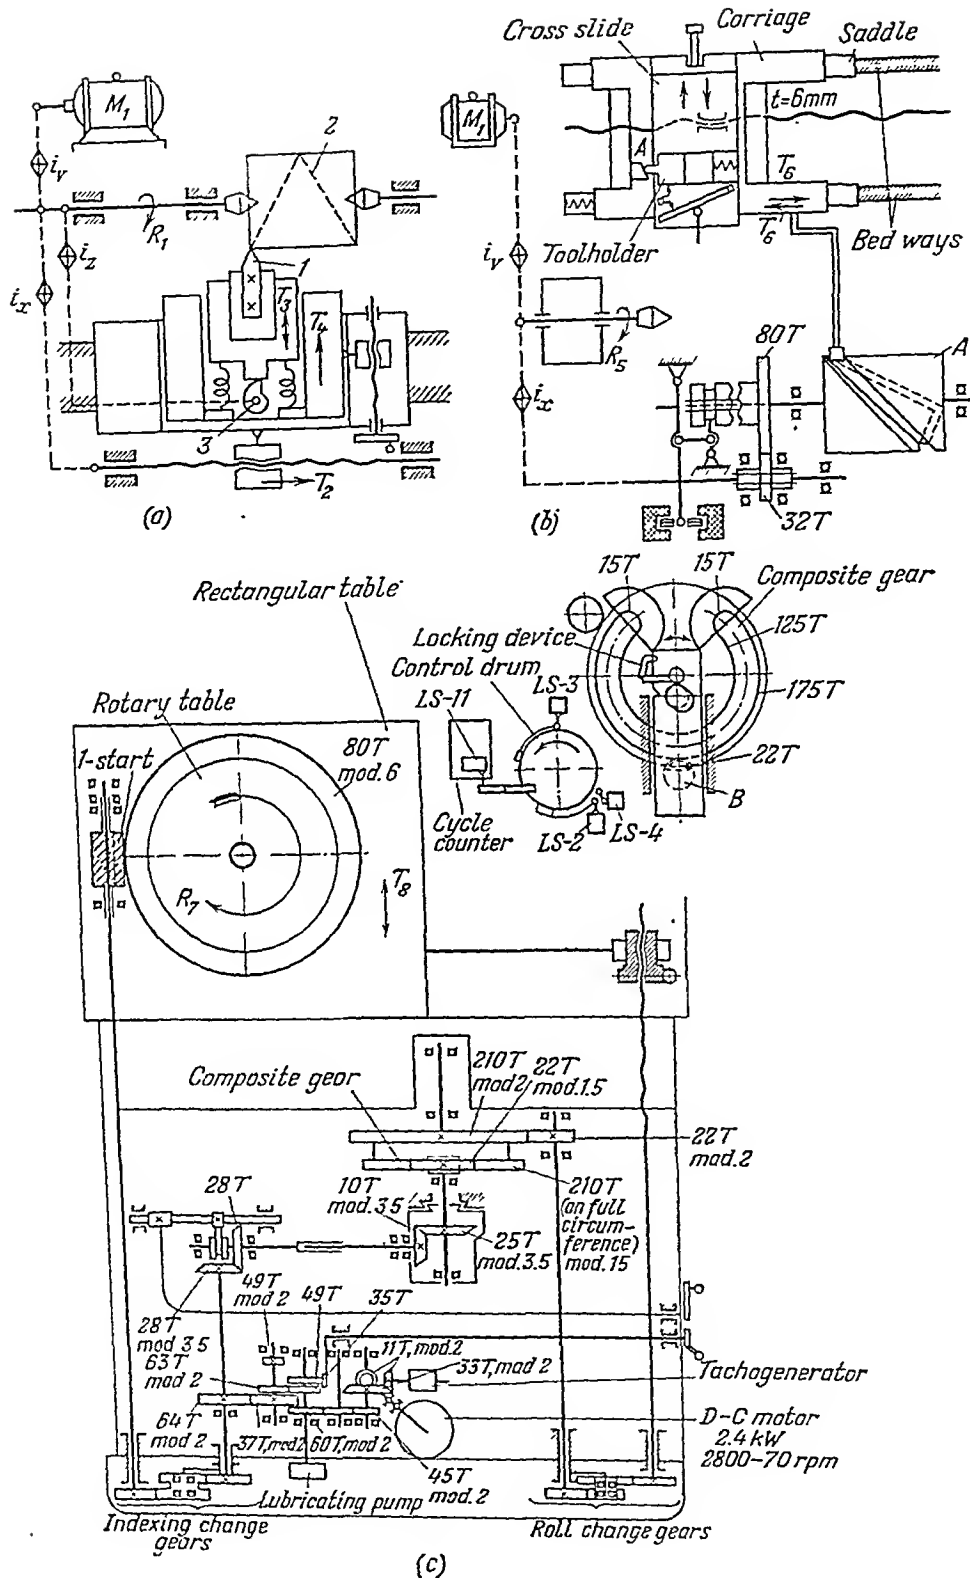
Diagrams of machine tools with series-parallel group interconnection: (a) relieving lathe; (b) threading lathe, model 1921; (c) gear grinder, model 5П84
